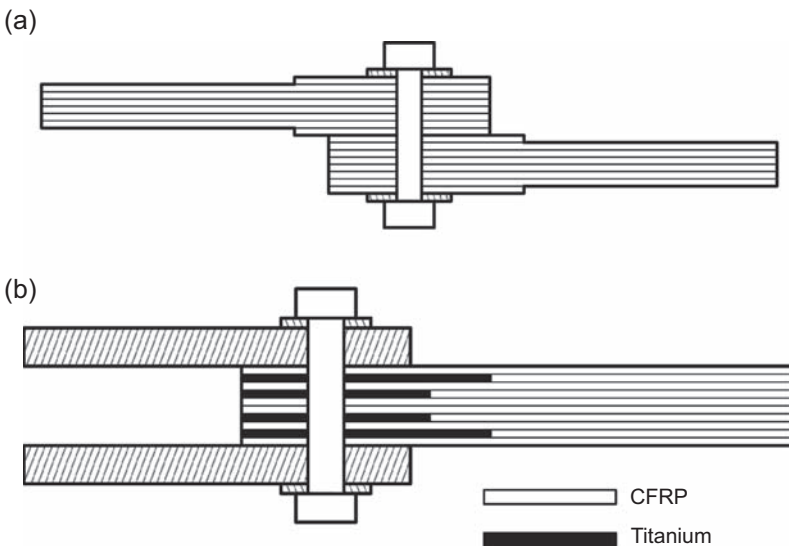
Schematic sectional view of: (a) single-lap bolted CFRP joint; (b) double-lap bolted hybrid composite joint with four composite layers locally substituted by titanium plies. Reproduced from: Kolks, G., Tserpes, K.I., 2014. Efficient progressive damage modeling of hybrid composite/titanium bolted joints. *Composites Part A: Applied Science and Manufacturing* 56, 51–63.
